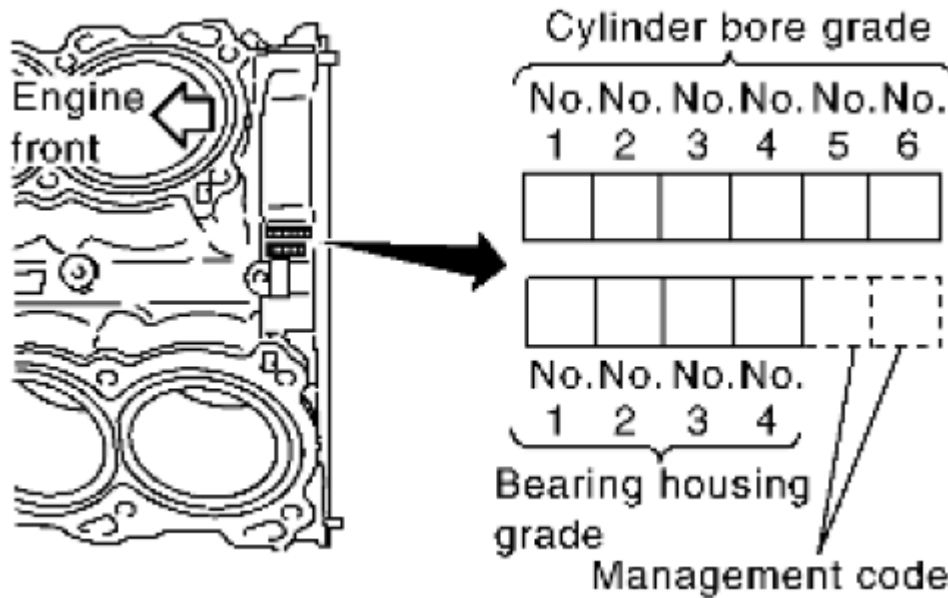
Identifying Bearing Housing Grade And Cylinder Bore Grade
